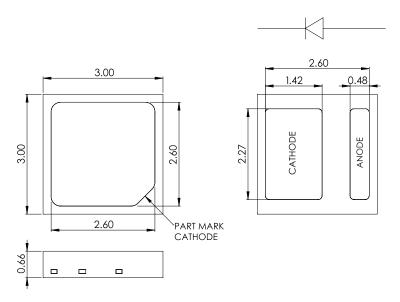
Mechanical dimensions for LUXEON 3030 HE
